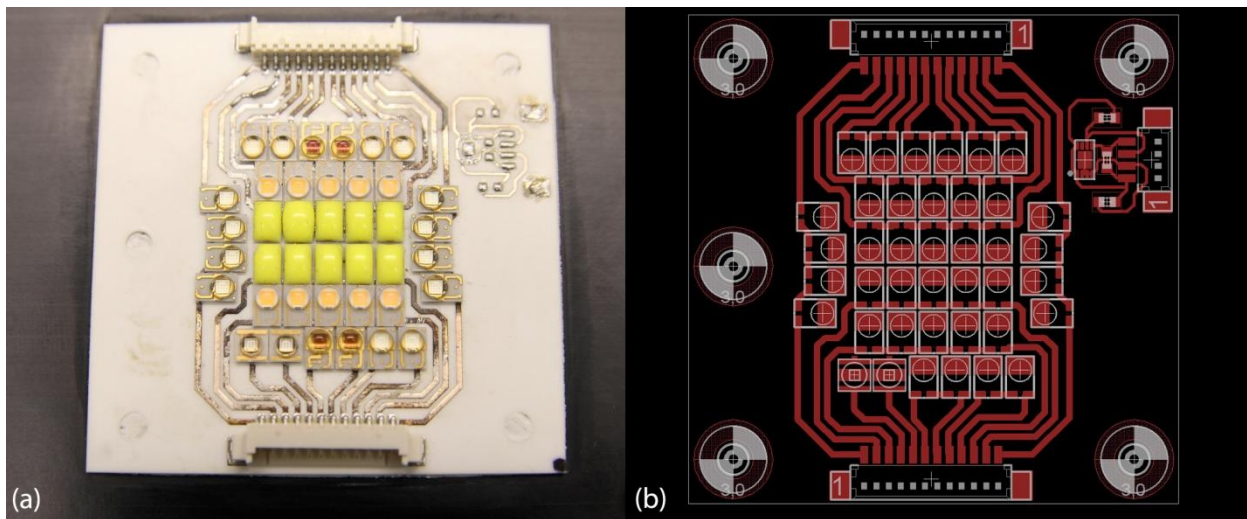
Prototype IV PCB. Finished alumina-based board (a) and PCB design (b).
